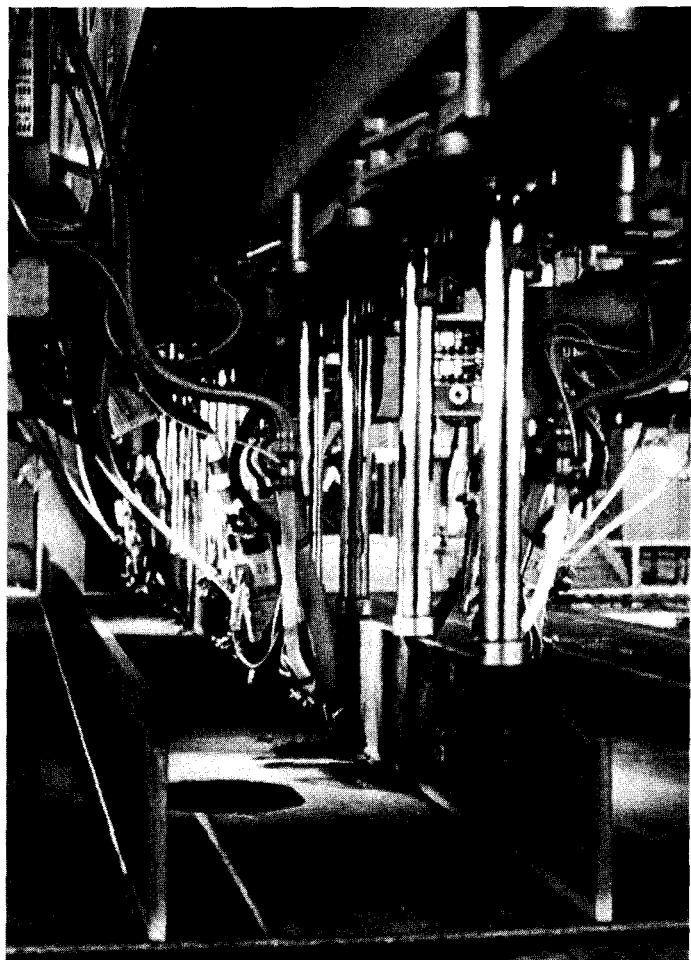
Flat Panel Line Stiffener Welding Workstation Showing Hydraulic Rams
